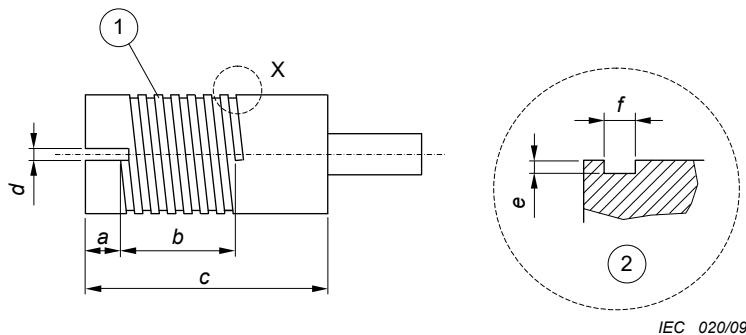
shows an example of the test equipment with details of the mandrel given in Figure 2 and Table 1. Figure 2 indicates a helical groove, which may be used to facilitate winding. The provision of this groove, however, is not mandatory. The dial is marked with 72 equally spaced divisions so that with five turns of the wire the reading corresponds to the number of degrees that each turn springs back.
